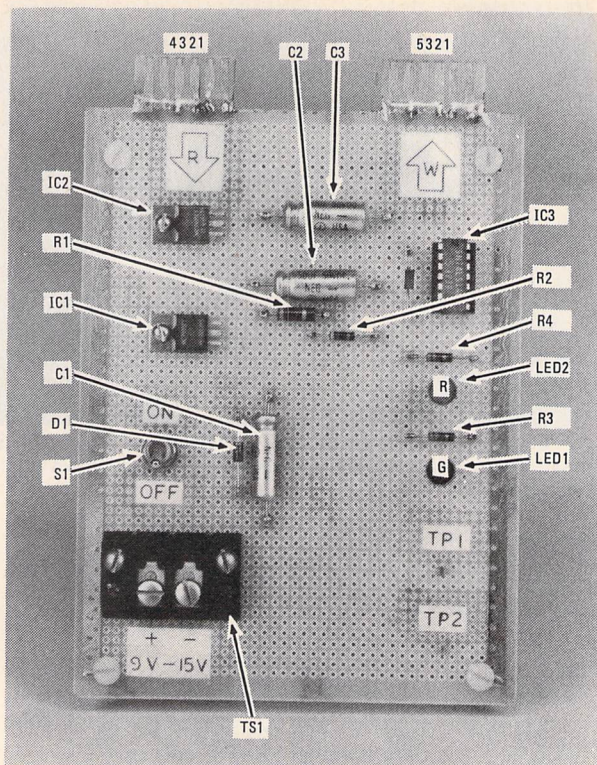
COMPONENT LAYOUT for point-to-point wiring of the interface board.
